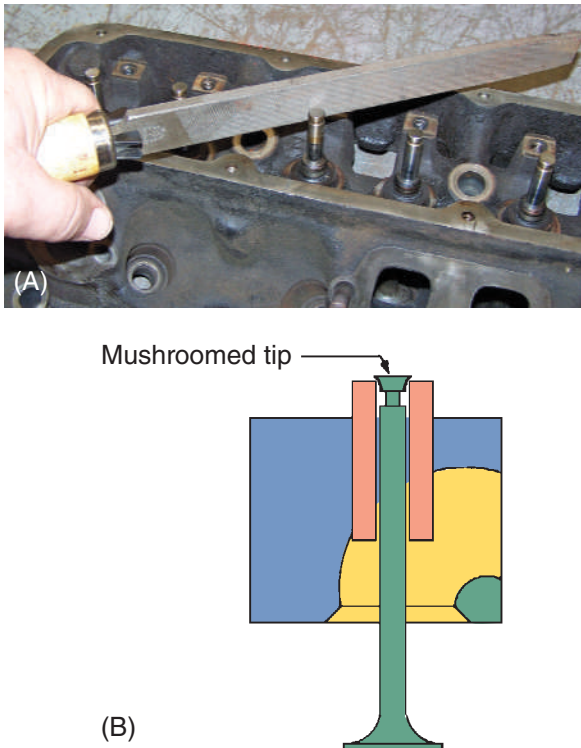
A mushroomed valve tip should be (A) filed before removing the valve from (B) its guide.
